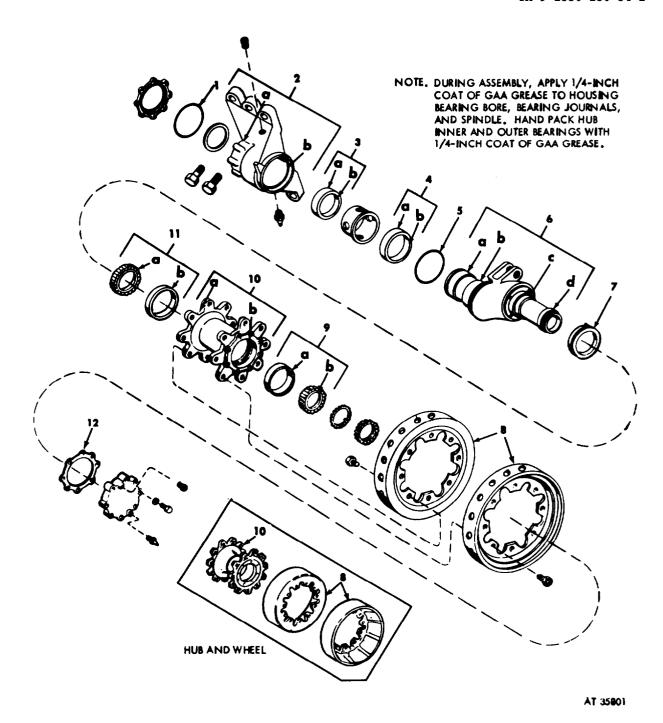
Track hydraulic adjuster idler arm assembly - repair data.
